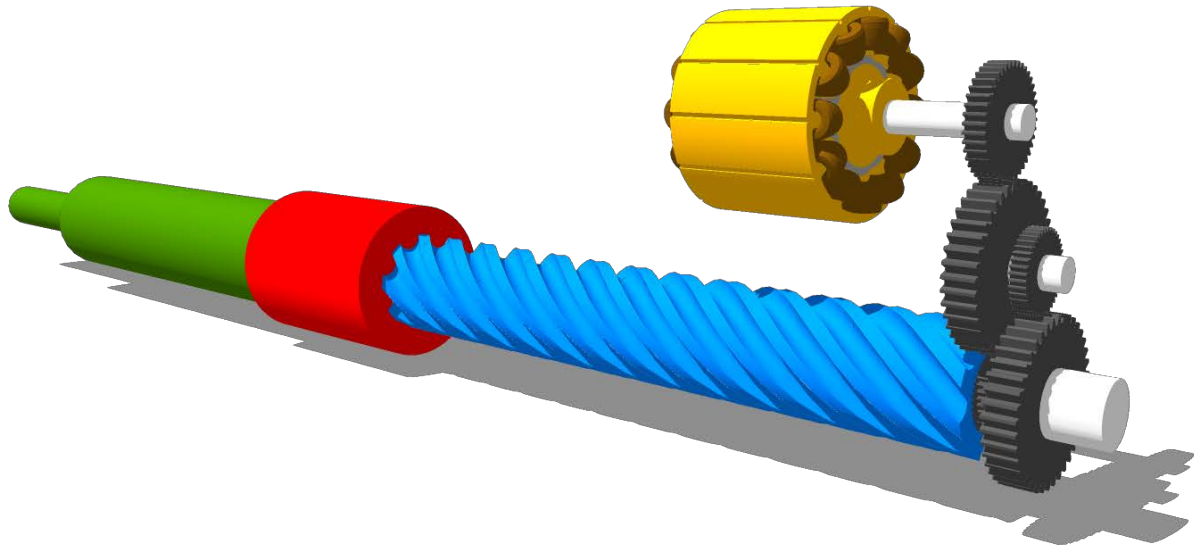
Guts of an electromechanical actuator [4] showing the motor (yellow) with its windings, the gears (gray) of the gear box, the screw (blue) of the ball screw, the ball housing (red) of the ball screw, and the rod (green) into which the screw slides.
